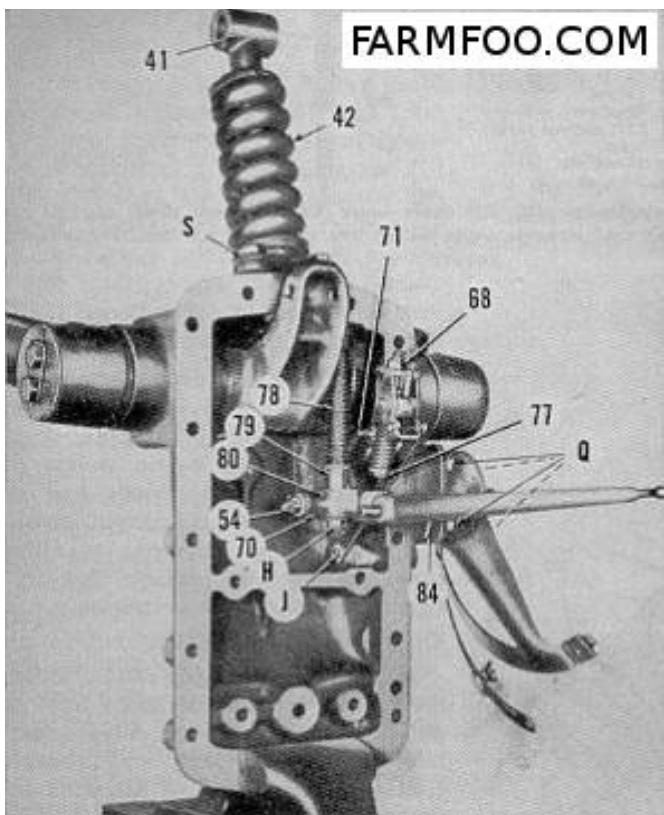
Model 8N lift housing cover when viewed from lower side with ram cylinder removed.
